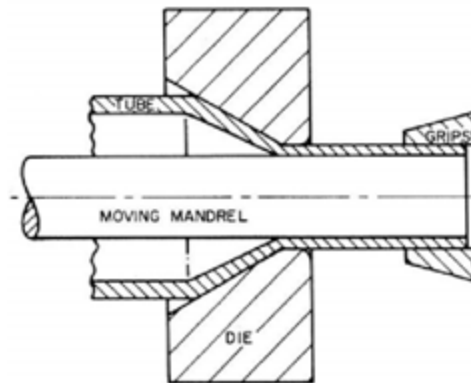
Tube drawing with moving mandrel [4.17].
